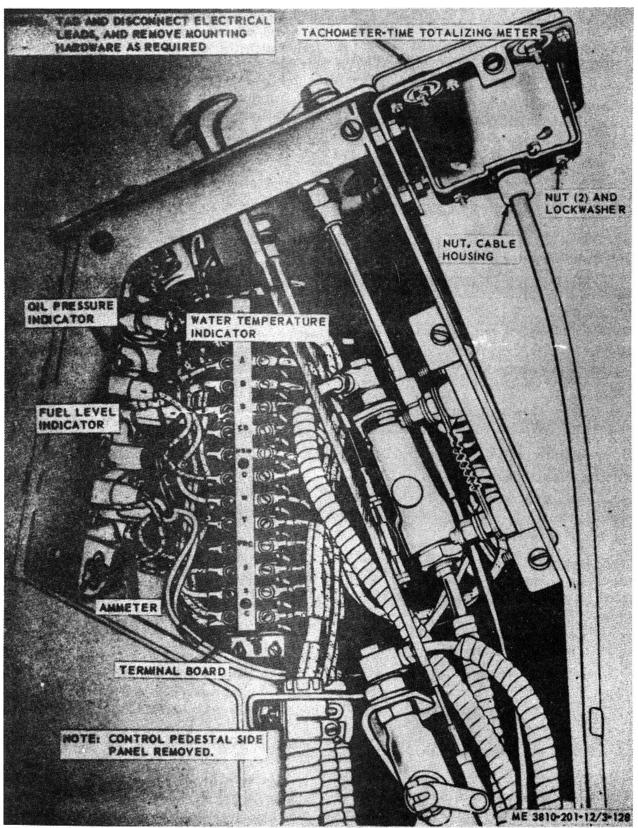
Tachometer-time totalizing meter, oil pressure indicator, fuel lever indicator, and ammeter, removal and installation.
